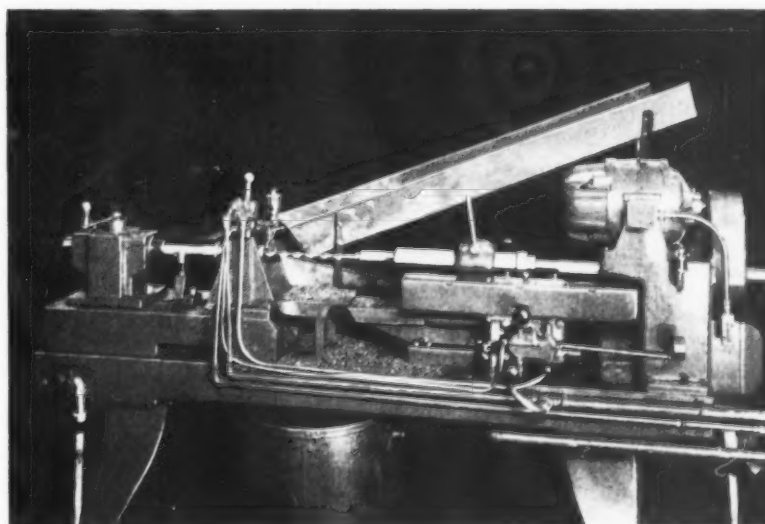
Drilling a Blind Hole 51/64 Inch in Diameter and Almost 9 Inches Deep in an Iron Casting for Textile Machinery
